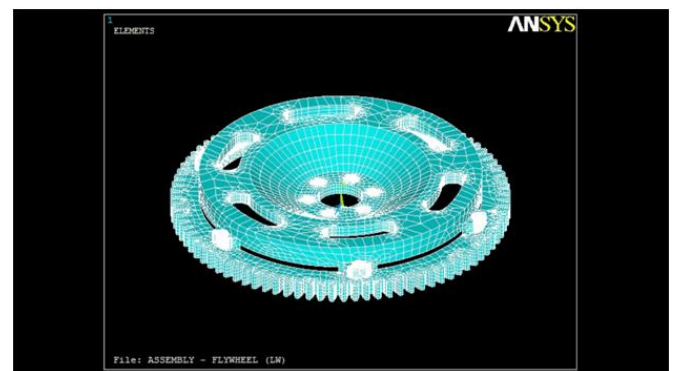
Meshing FLYWHEEL ASSEMBLY
